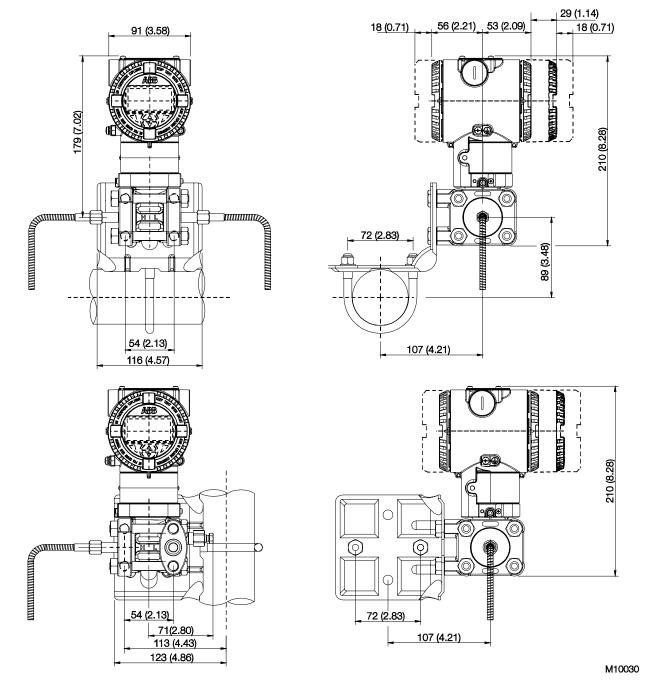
Dimensions - Barrel housing with mounting bracket for vertical or horizontal mounting on 60 mm (2 in.) pipe
